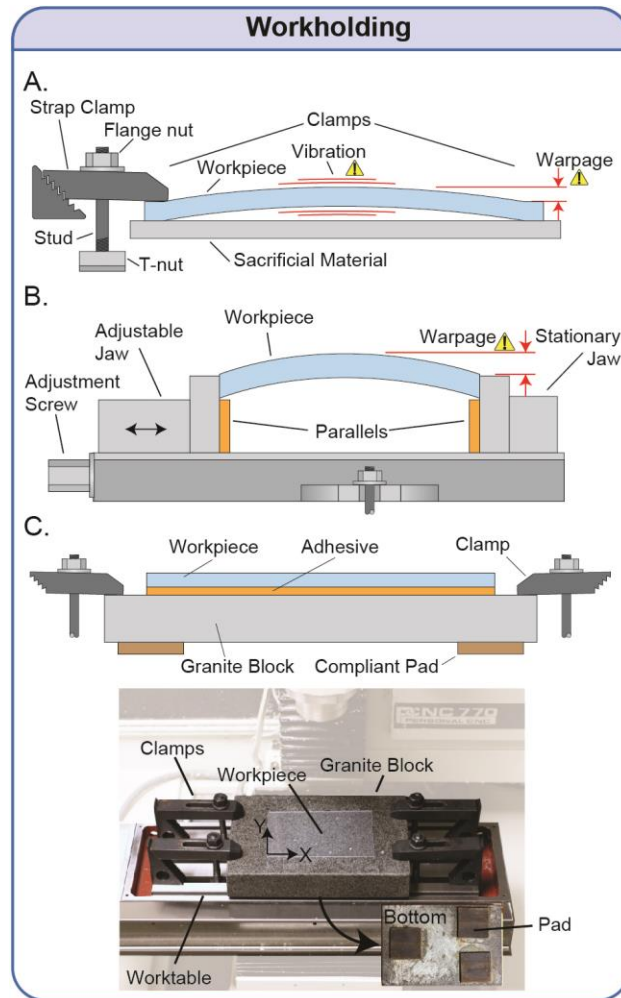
Simple low-cost workholding techniques. (a) Strap clamps can be used to secure the workpiece directly to the worktable. Use of sacrificial material will prevent damage to the worktable when milling through the workpiece. It is important to check for warpage when clamping thin materials, and to minimize vibrations when milling the device. (b) A vise is advisable for large objects. Parallels are often used to offset the object from the floor of the vise. Warpage can occur in thin materials, or from over-tightening. (c) Using adhesives to secure the workpiece to a known flat surface can reduce warpage and vibrations. A granite block is secured to the table using strap clamps at each of the four corners. Soft conformable pads below the granite block allow height adjustment via the clamps to level the block.
